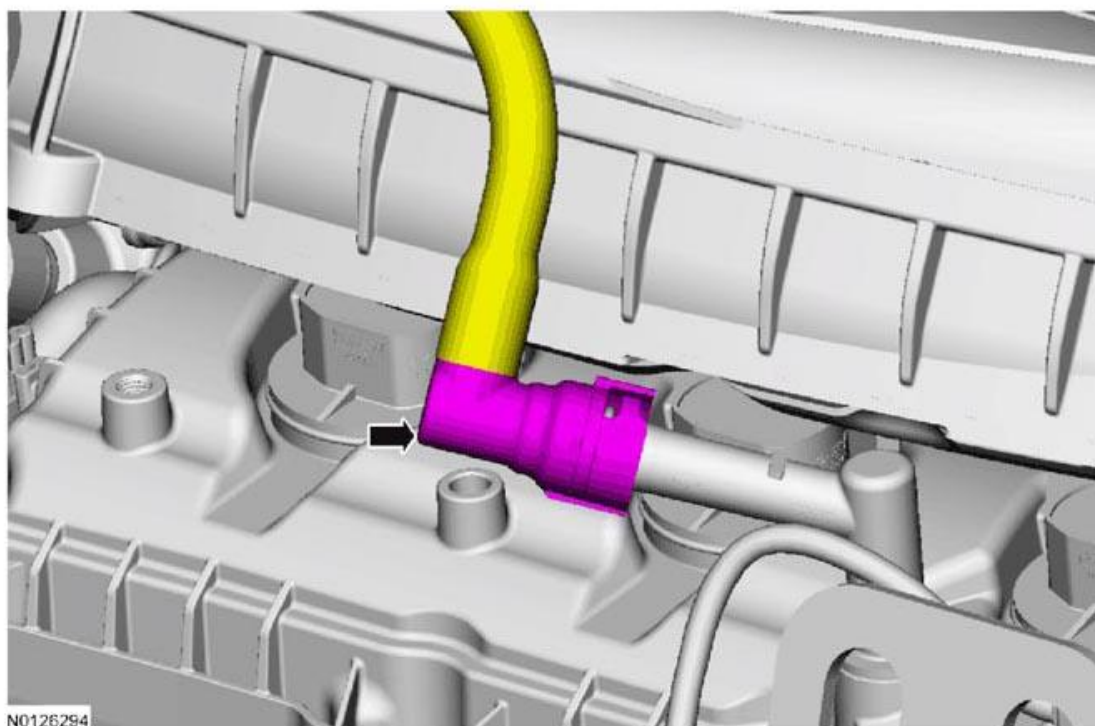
Locating Crankcase Ventilation Oil Separator Tube And Intake Manifold Bolts
